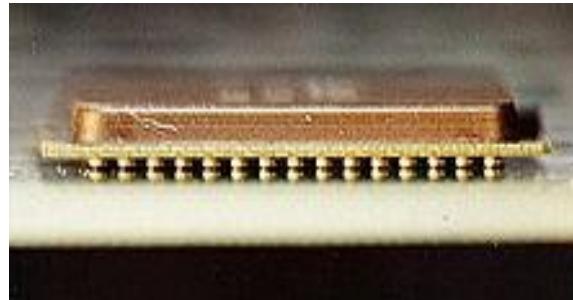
mask and spheres for re-balling & good solder joints between BGA and PCB
